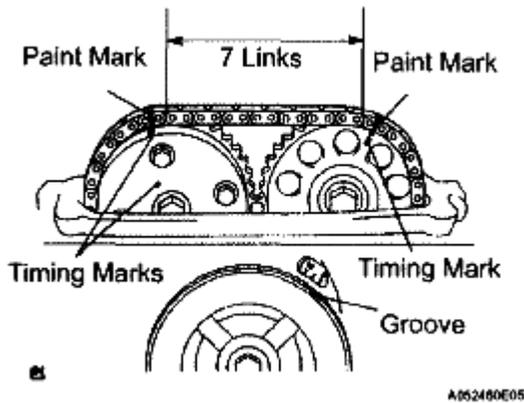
Checking Crankshaft Pulley Grooved Is Aligned With Timing Mark
